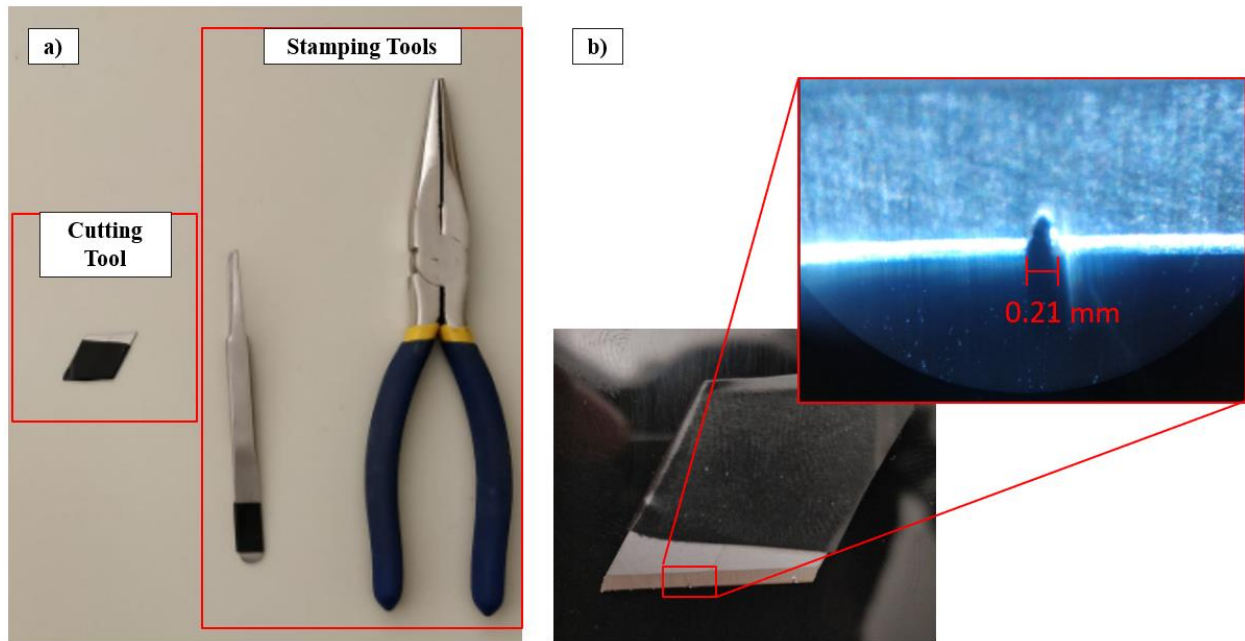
(a) Tools used for manufacturing DUT specimen, (b) Cutting tool with zoomed section of retention notch
